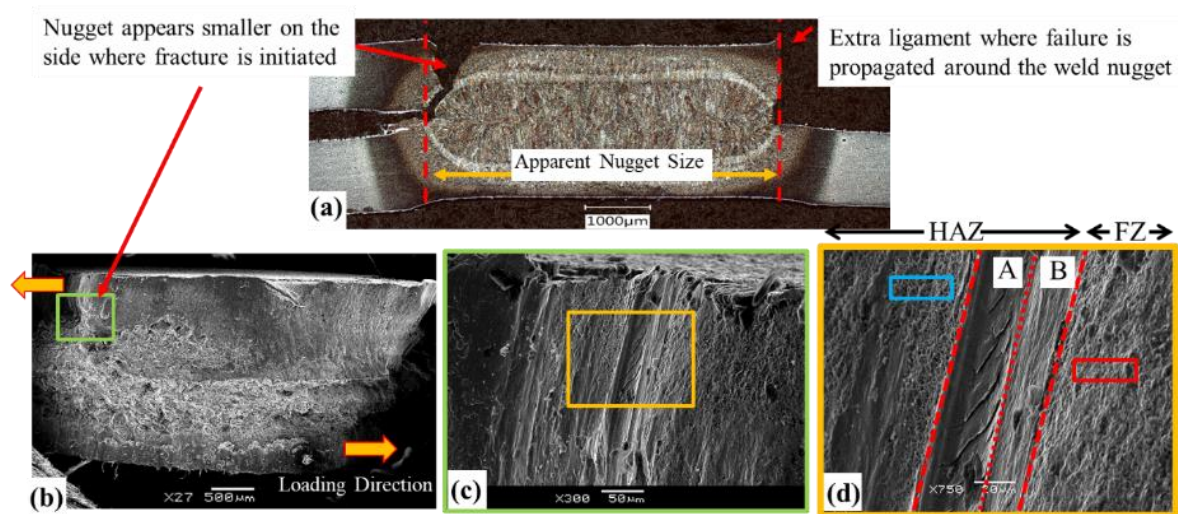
The optical and SEM micrographs obtained from U1500-FQ spot weld failed under shear loading showing failure due to shearing at the halo ring: (a) the non-symmetrical shape of the weld nugget after failure, which appears smaller on the side where failure is initiated (b) overall shape of the weld nugget, (c) higher magnification of the blue rectangle in (b), (d) Higher magnification image showing the S-shaped shear band (A) and heavily distorted band (B) due to failure.
